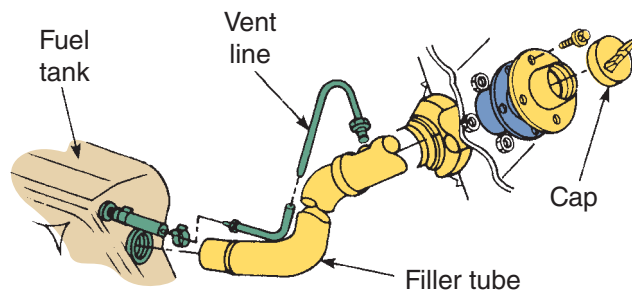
Vent lines within the fuel tank filler tube control the fuel level.
